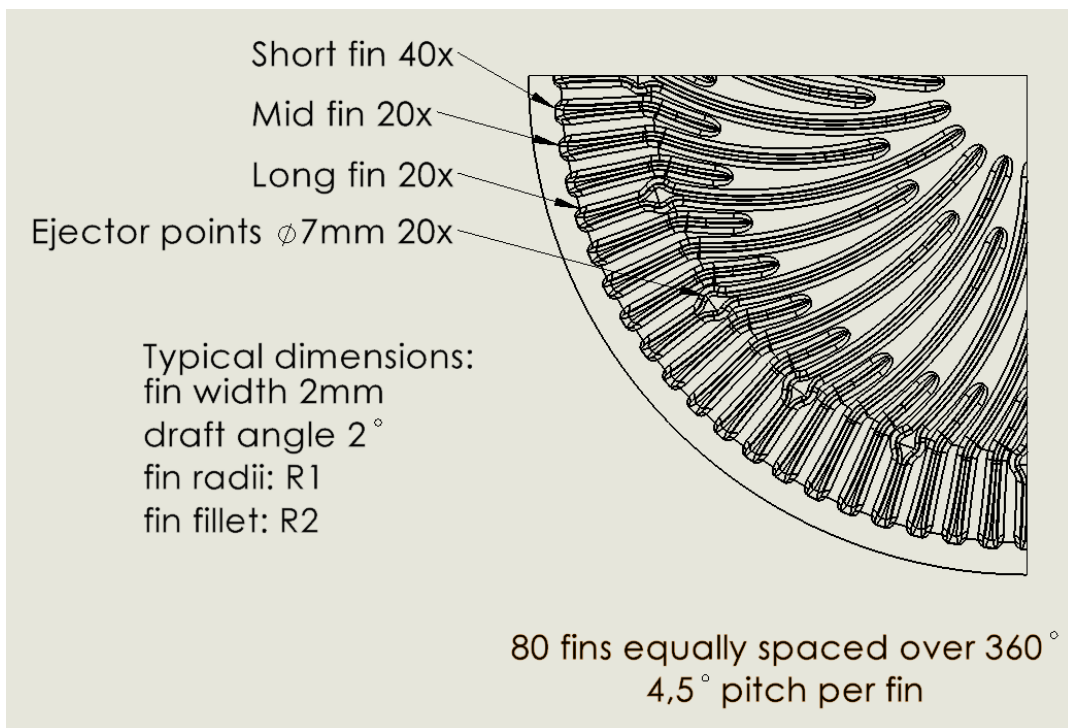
technical drawing of bottom view quarter. Bottom geometry specifications.
